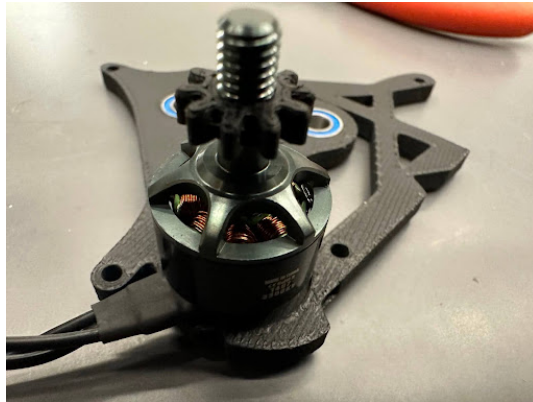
Screw the 10T threaded gear onto the motor, you may need to use needle nose pliers to hold the gear and then twist the motor with your fingers until it is all the way on. Before proceeding be sure to refine your printed gears by carefully sanding.
